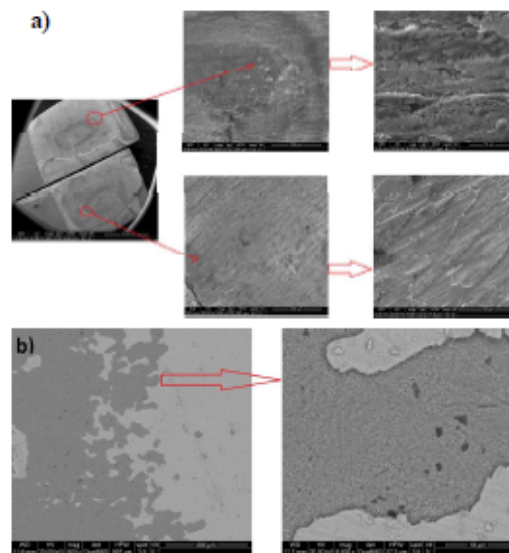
Samples of surface fracture microstructure a. after shearing and b. after detachment due to fatigue of mechanical cycling.
